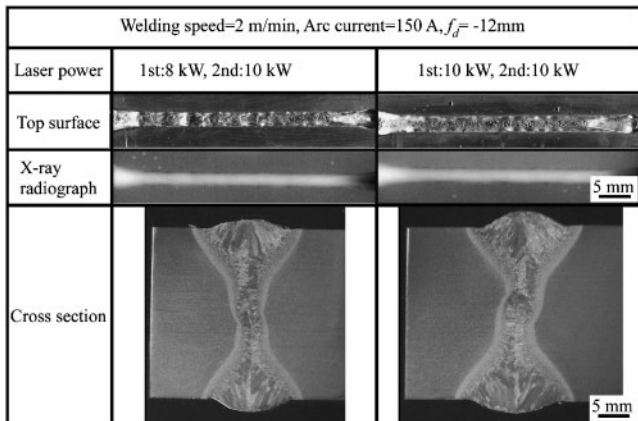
Bead appearances, X-ray radiographs and cross sections of square-groove butt welded joints of 12 mm thick Ti-6Al-4V titanium alloy by single-pass hybrid welding from both sides with different laser power.
